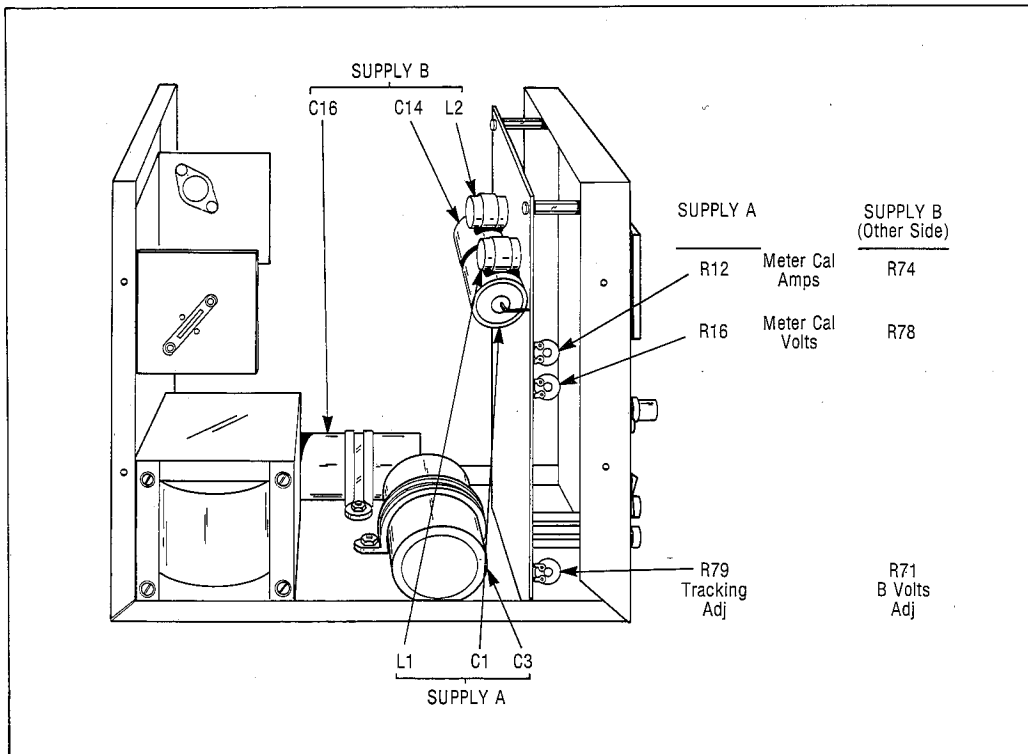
Additional Chassis Mounted Parts and Locations of Calibration Adjustments.
